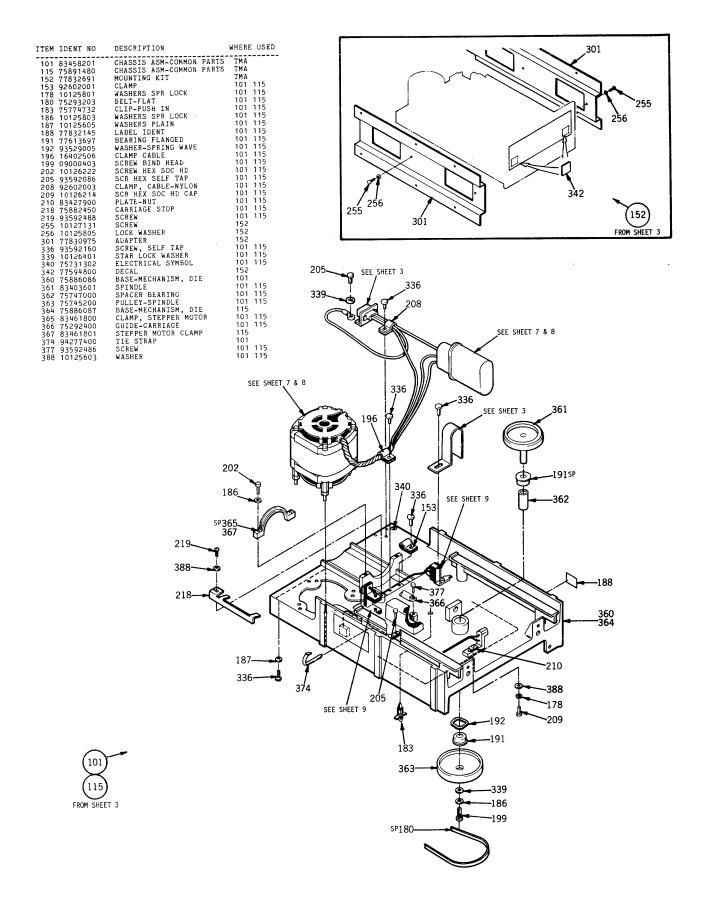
FDD COMMON PARTS (SHEET 1 OF 2)
